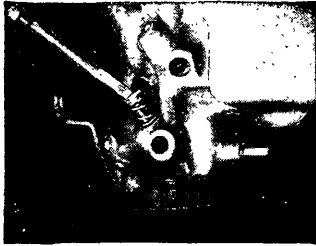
Install idle adjusting screw and spring. Back screw out from seated position to specifications given in Carter Specification table
